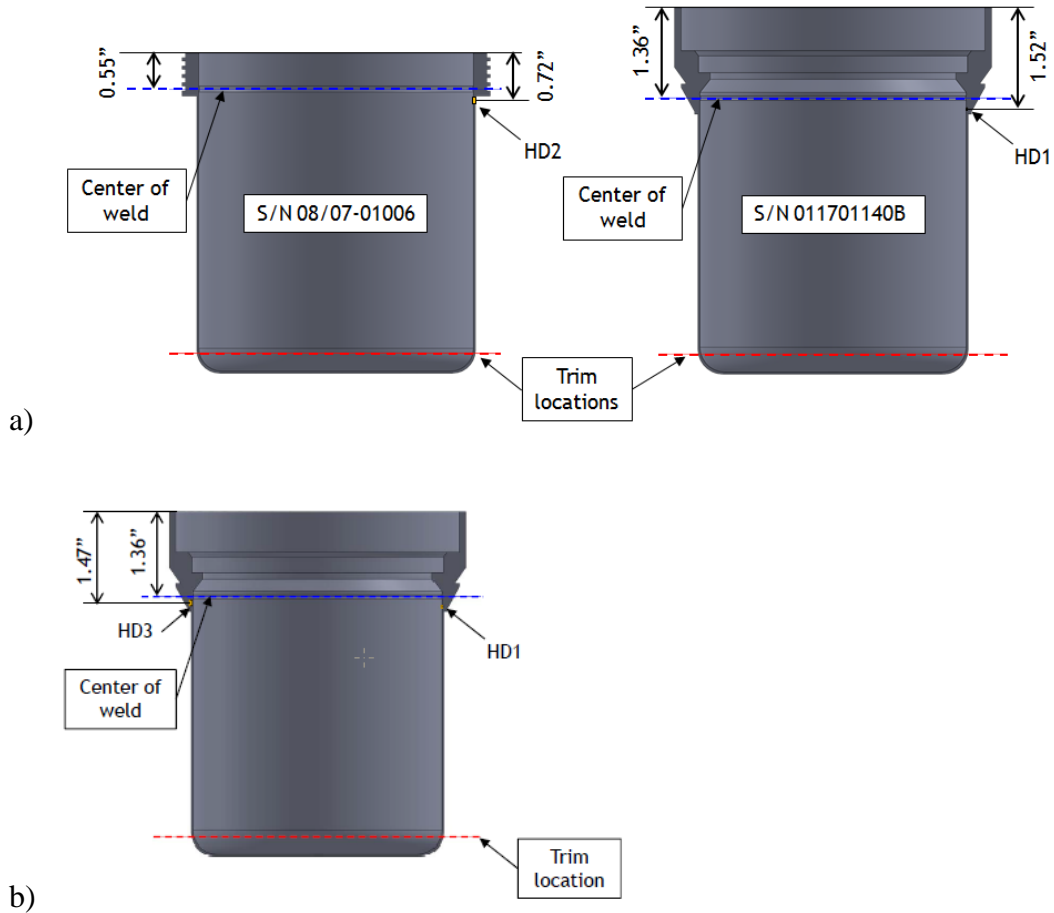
Sectioning and hole drilling locations on a) the Hagan (S/N 08/07-01006)-HD2 and SAVY 4000 (S/N 0117011408) – HD1 and b) SAVY 4000-HD3.
